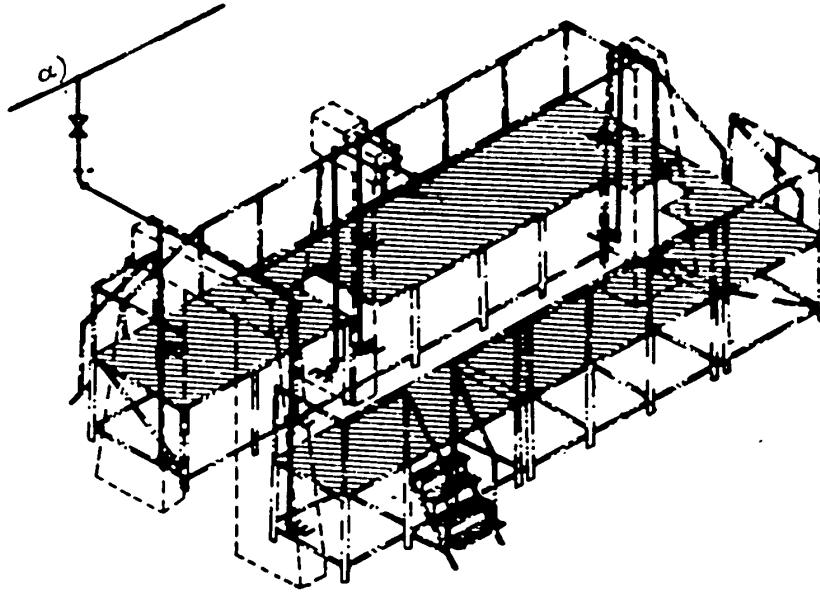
Outline of a Typical Compressed-Air Installation on Assembly Jigs
